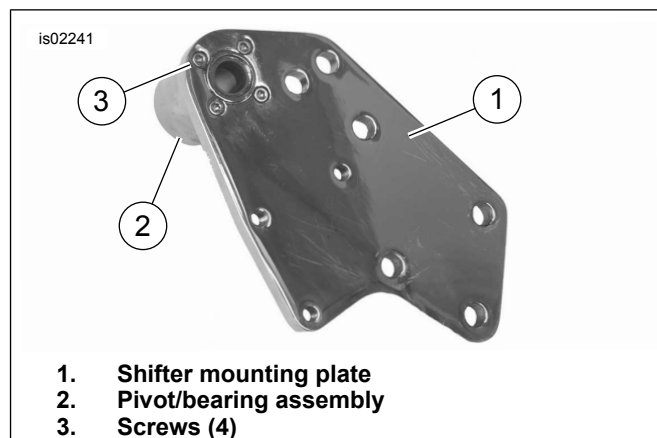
Install Pivot/Bearing Assembly to Shifter Mounting Plate
